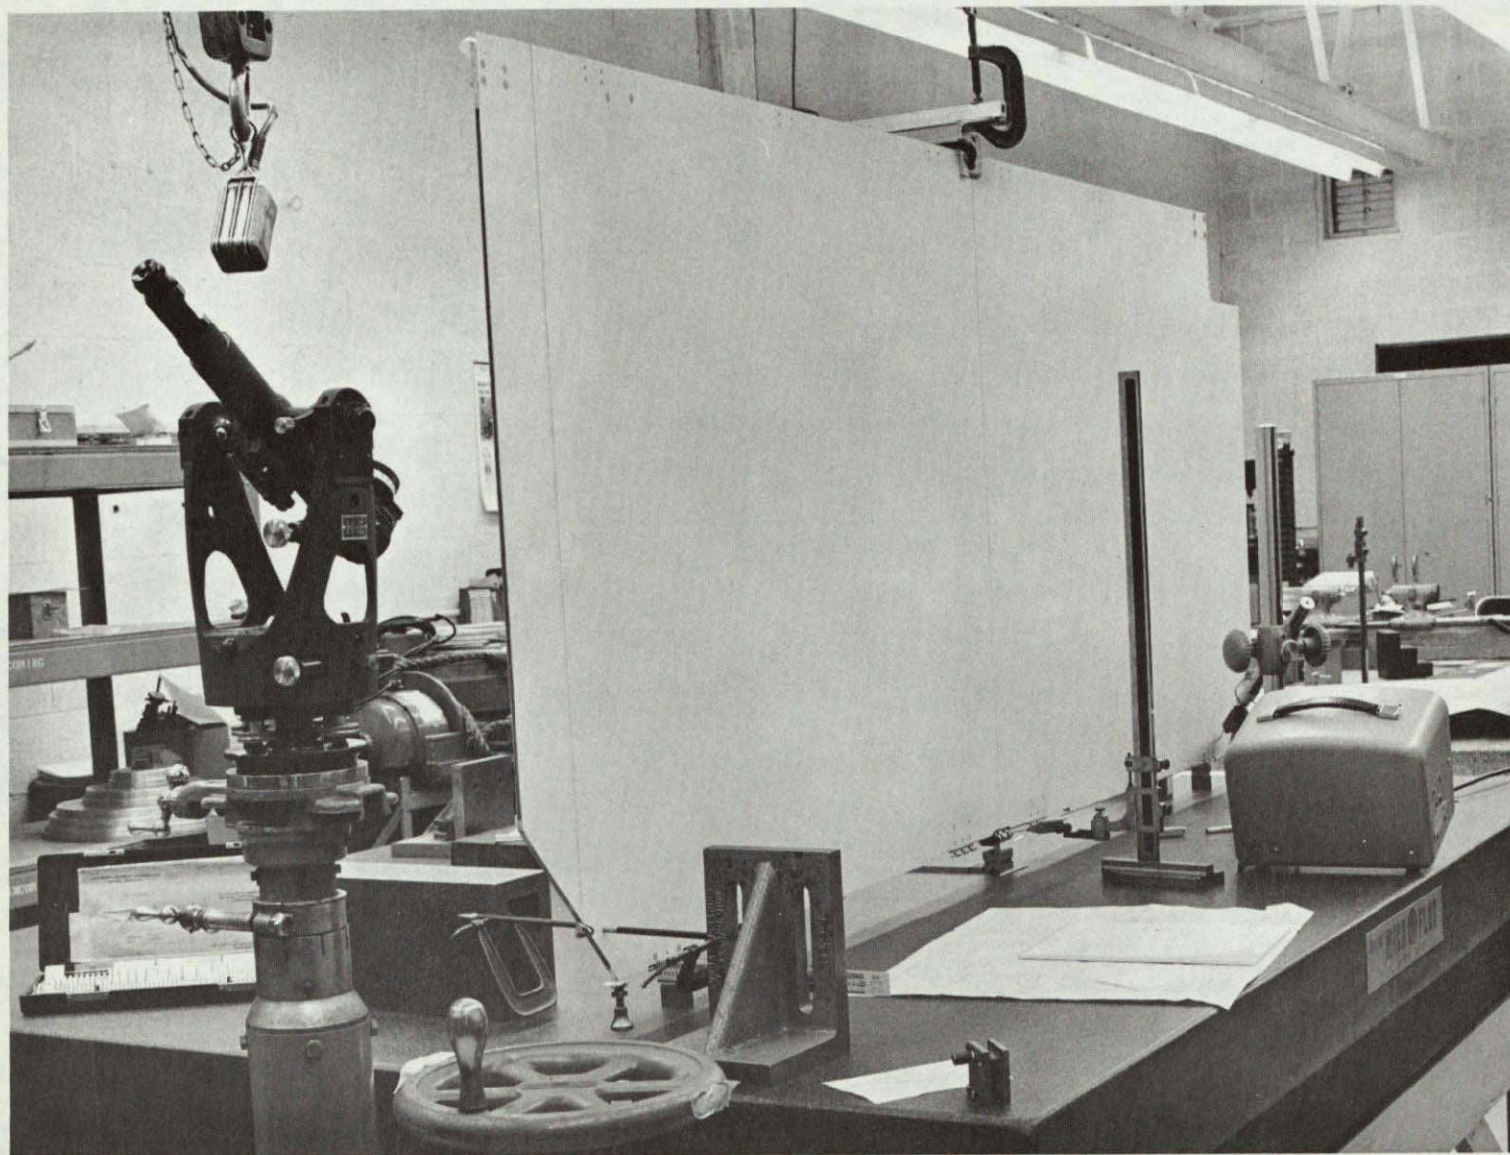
Holding Fixture and Optical Instrumentation for Dimensional Check, Sun Side Shown
